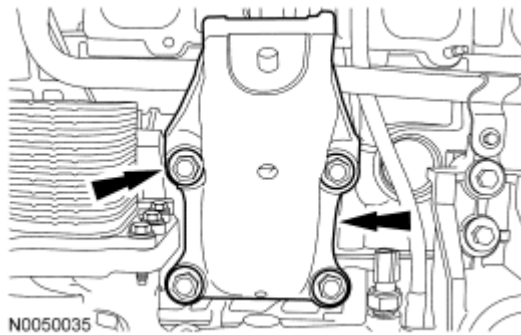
Identifying LH Engine Support Insulator Bracket Bolts
